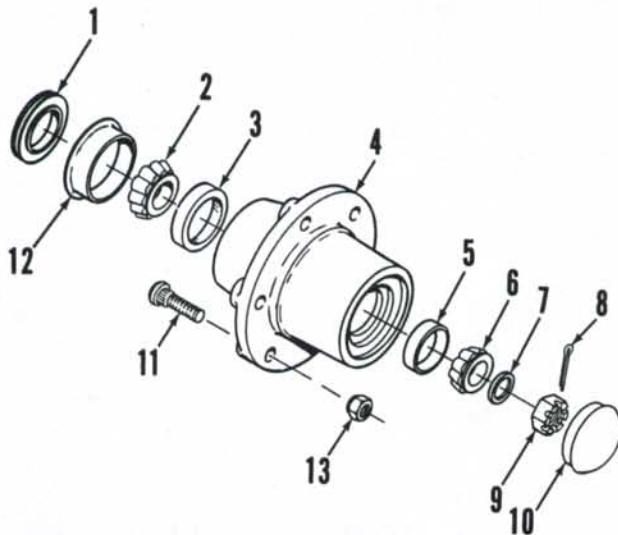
Exploded view of front wheel hub and bearings used on all two-wheel drive models equipped with adjustable front axles.
